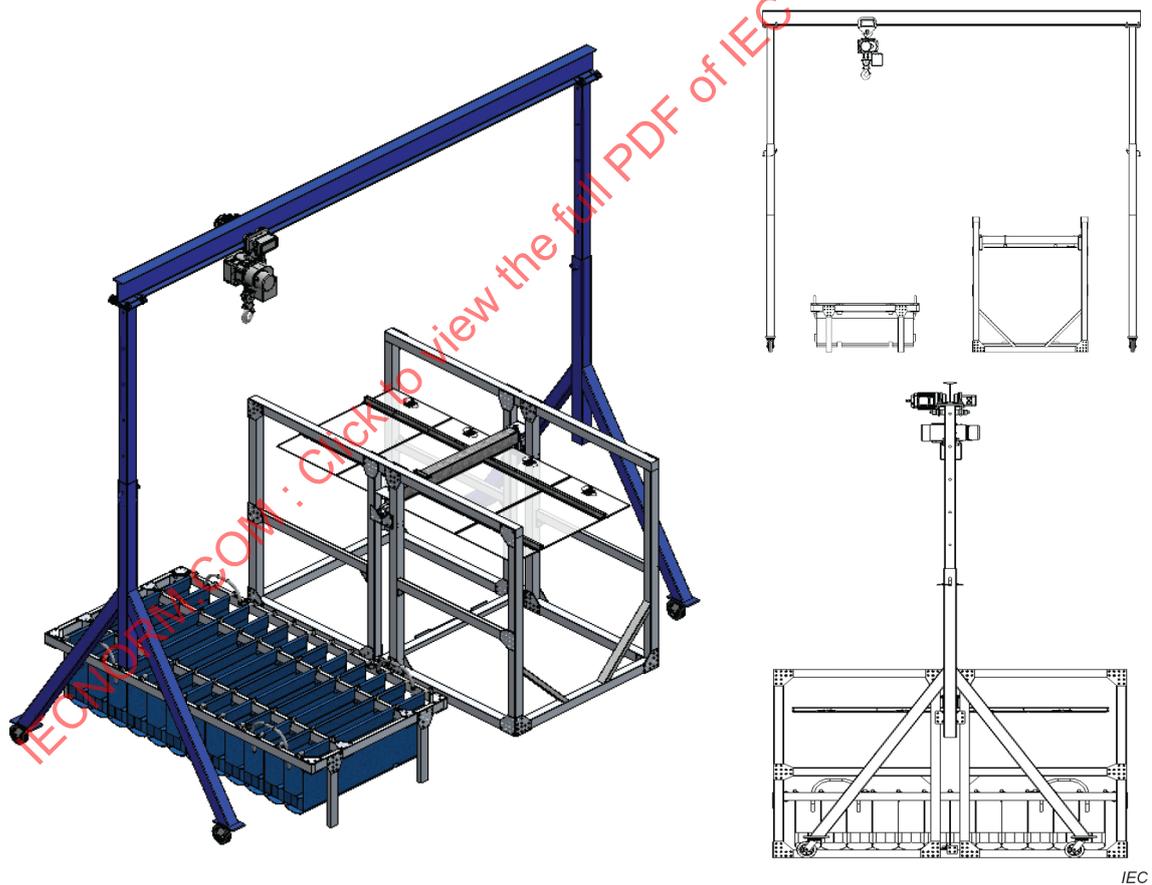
3D view (at left of figure), end view (at top right), and side view (at bottom right) of gantry crane over mounting jig and loading jig
